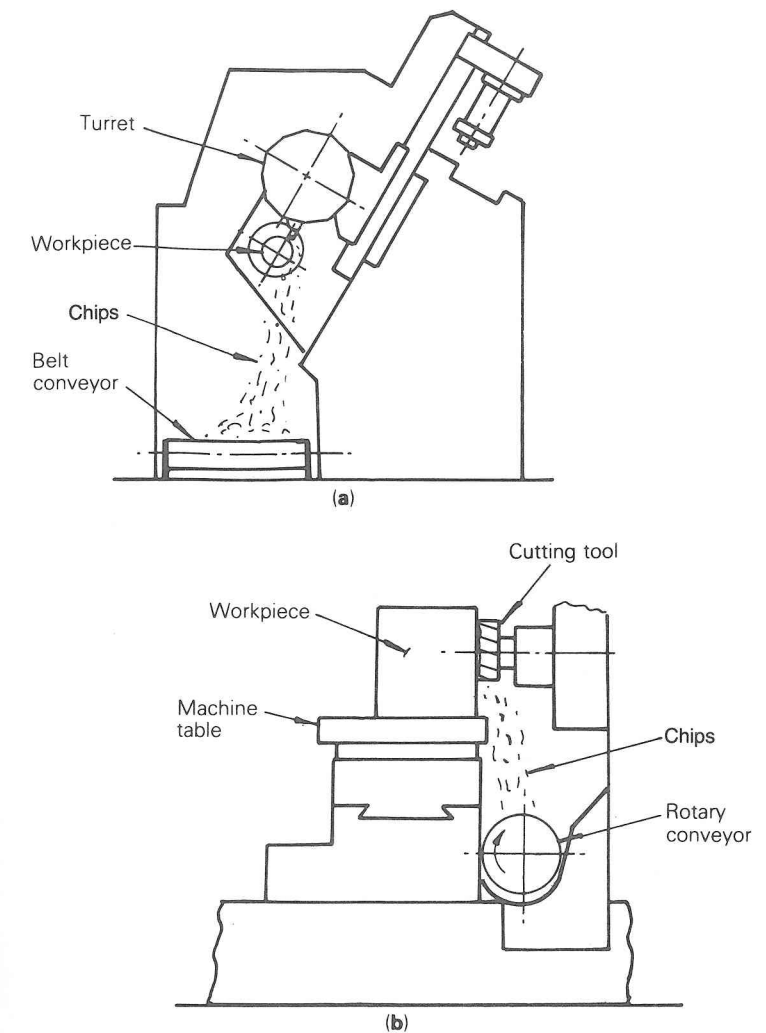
Chip removal arrangements: (a) turning center; (b) horizontal machining center.
